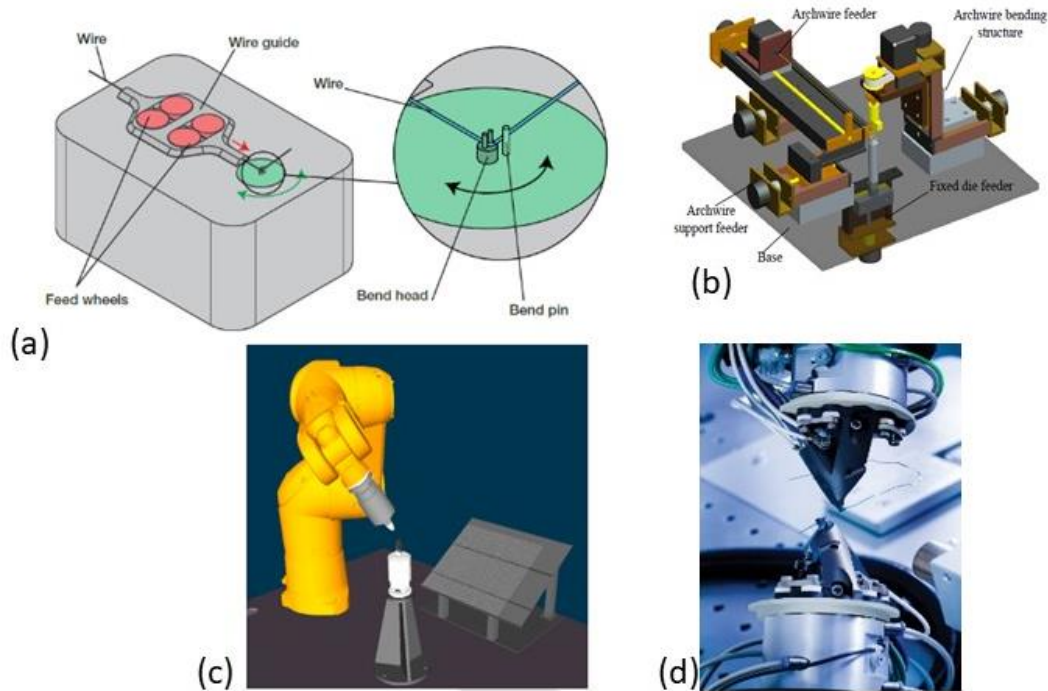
(a) DiWire by Pensalab[69], (b) Desktop bending machine [64], (c) Wire bender using ROS [62], (d) SureSmile Robot [63]
